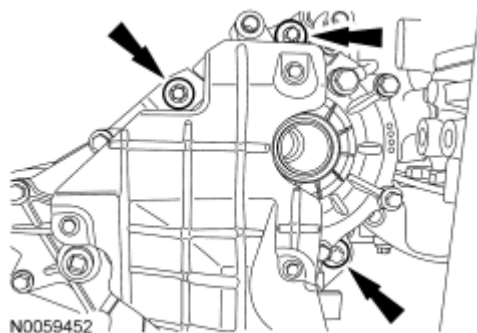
Identifying PTU-To-Transaxle Bolts And PTU
